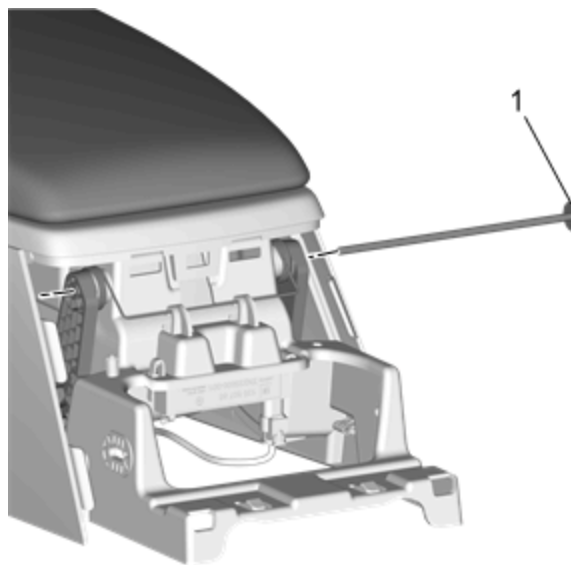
Front Floor Console Compartment Door Hinge Pin
